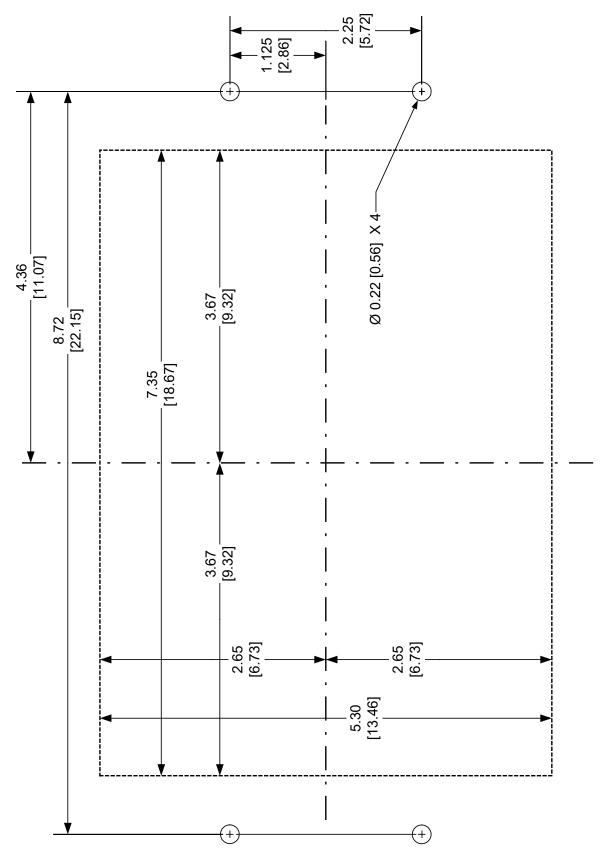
M-7679 Horizontal Panel Cutout Dimensions
